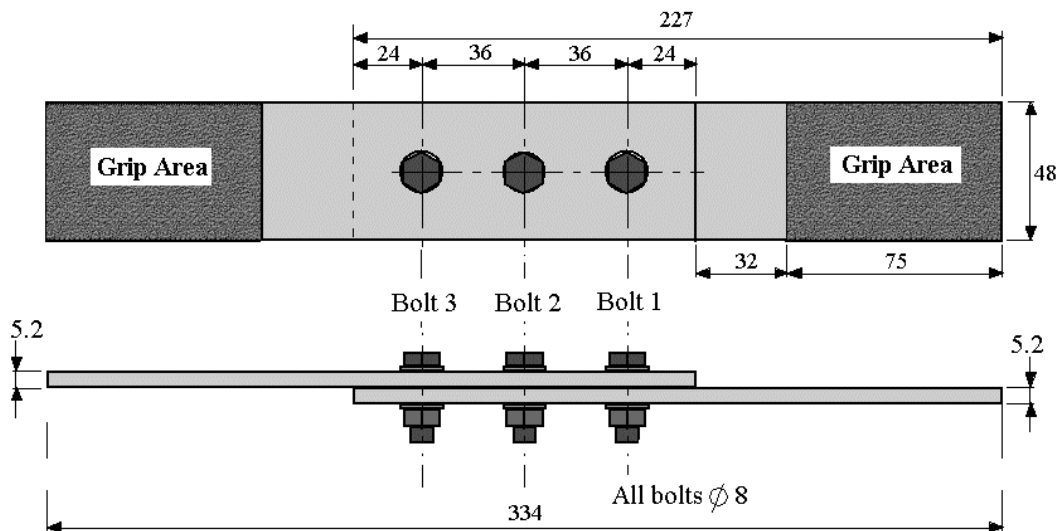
Single-lap, multi-bolt specimen geometry (all dimensions in mm)
